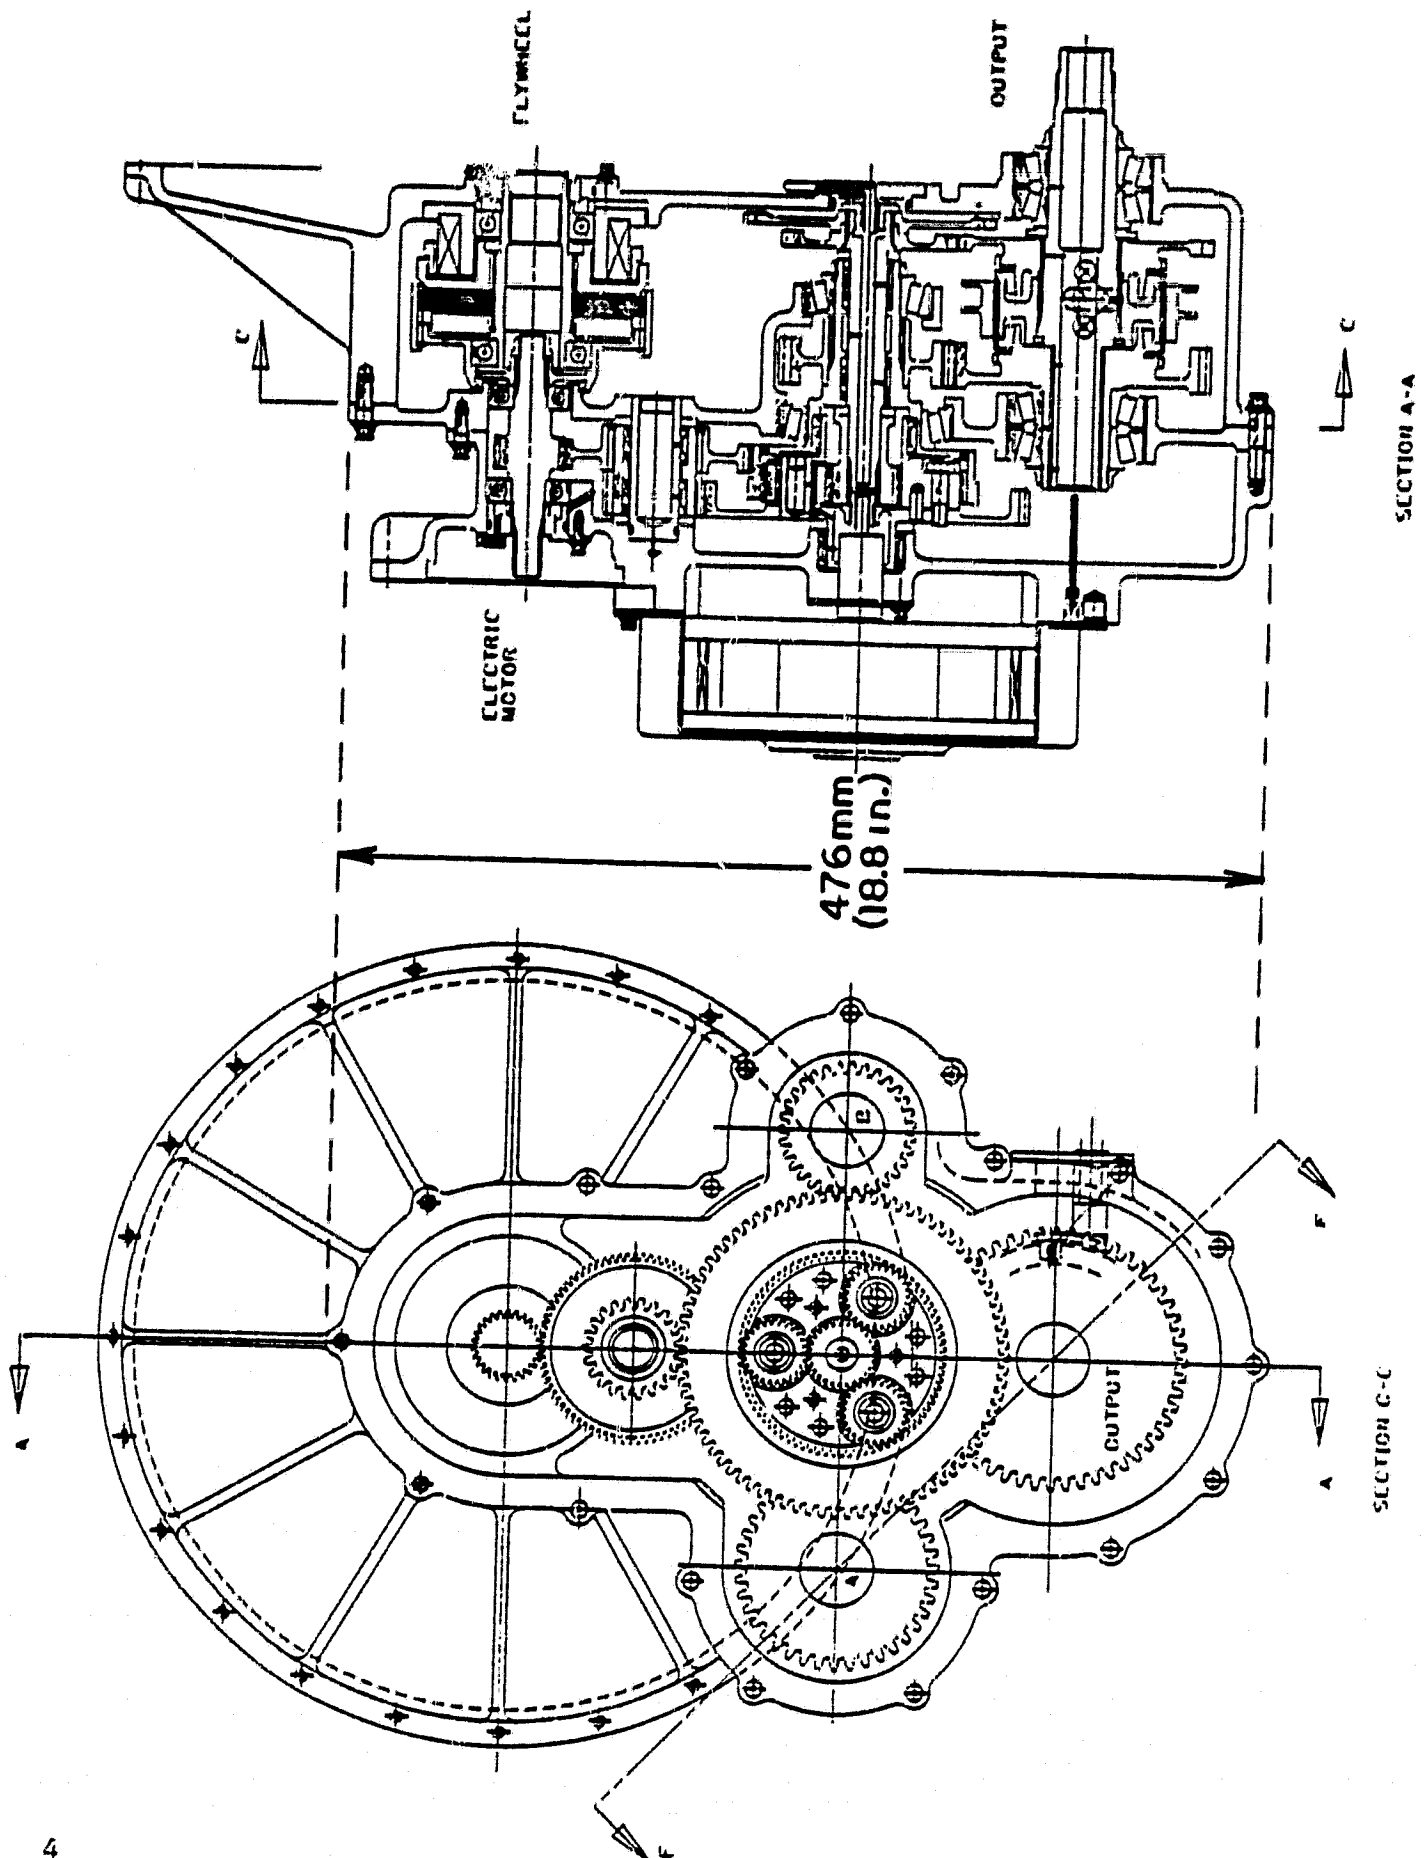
FLAT BELT TRANSMISSION - SHEET 1
